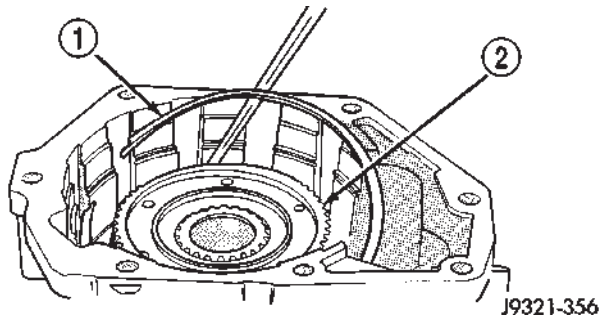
Overdrive Clutch Reaction Snap-Ring Removal
